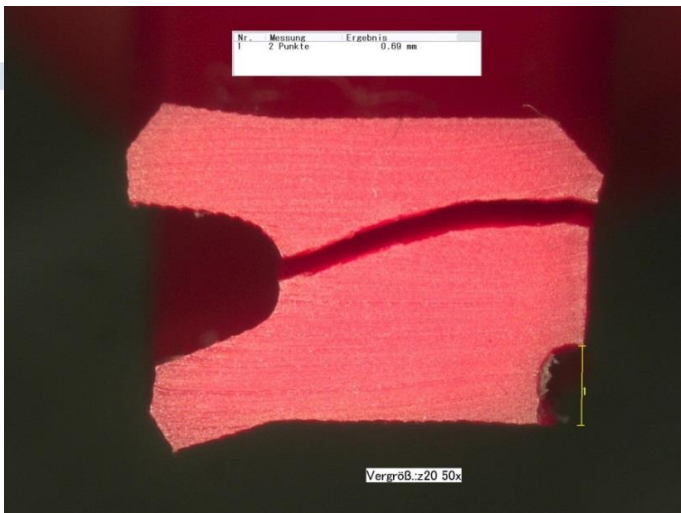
Damage to a dynamically used O-ring at the groove edges due to high breakaway forces
